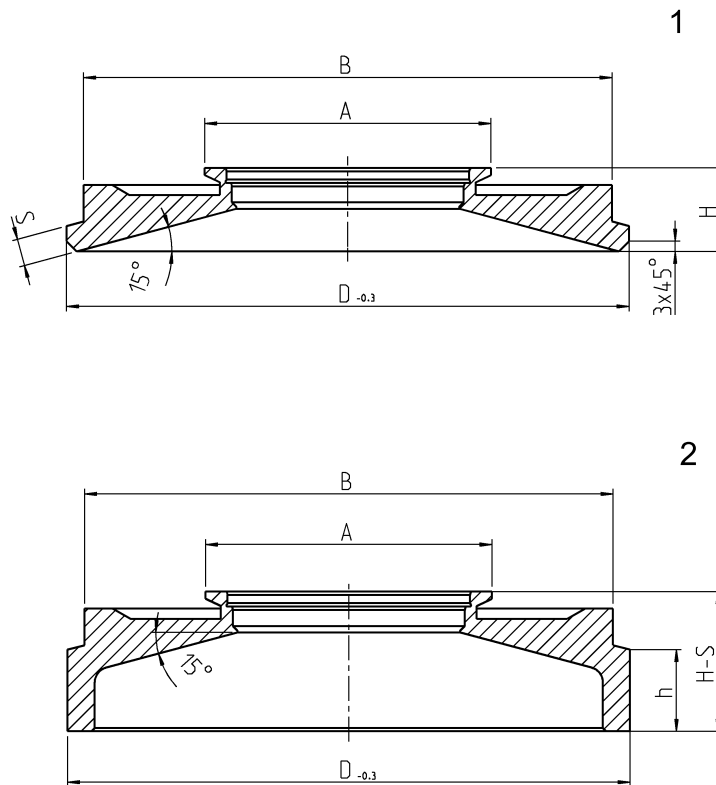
1= housing connection flange T / 2= housing connection flange T-S
